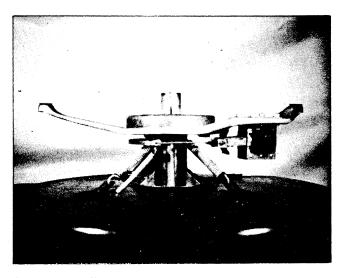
Collector Tub Inverted Showing Brake Assembly
